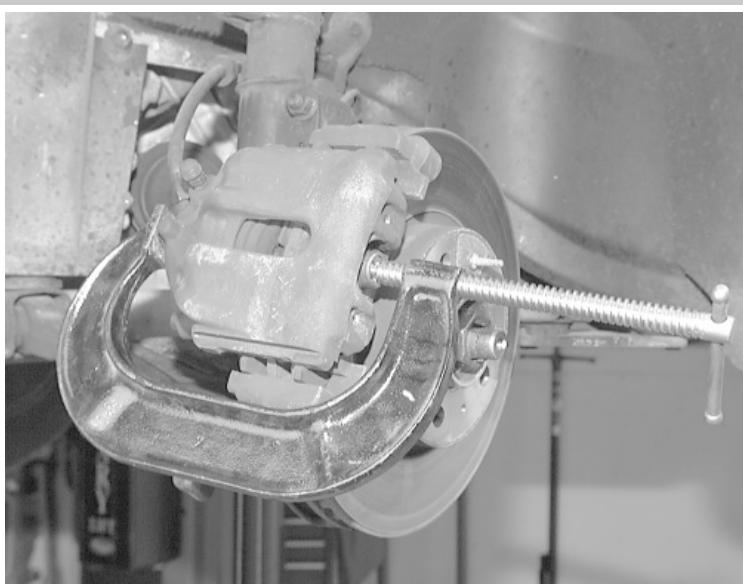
A large C-clamp is a useful tool to compress the piston
